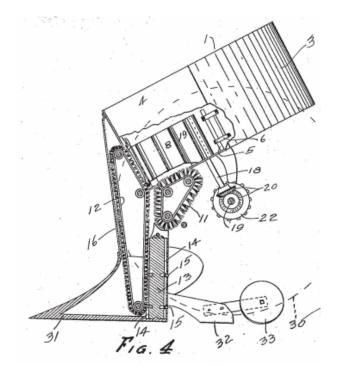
shows a sectional side elevation view of Gould's plant-setting machine. *Id.* at 1:38.
